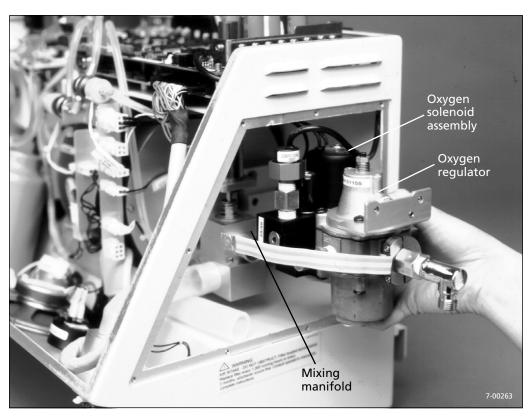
Removing oxygen regulator/oxygen solenoid assembly
